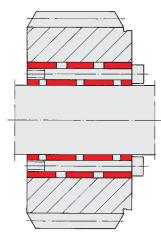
Gear fixture. For highest concentricity requirements, we recommend mounting a control facility to proof the concentricity and adjust by tightening the screws with different levels of torque. This ensures precise assembly.
